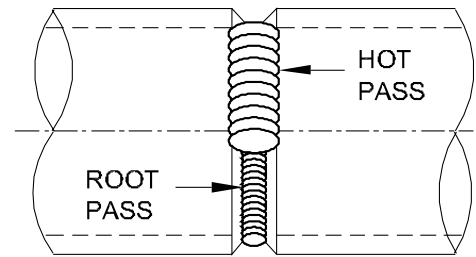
Hot Pass (Welding Sequence)
